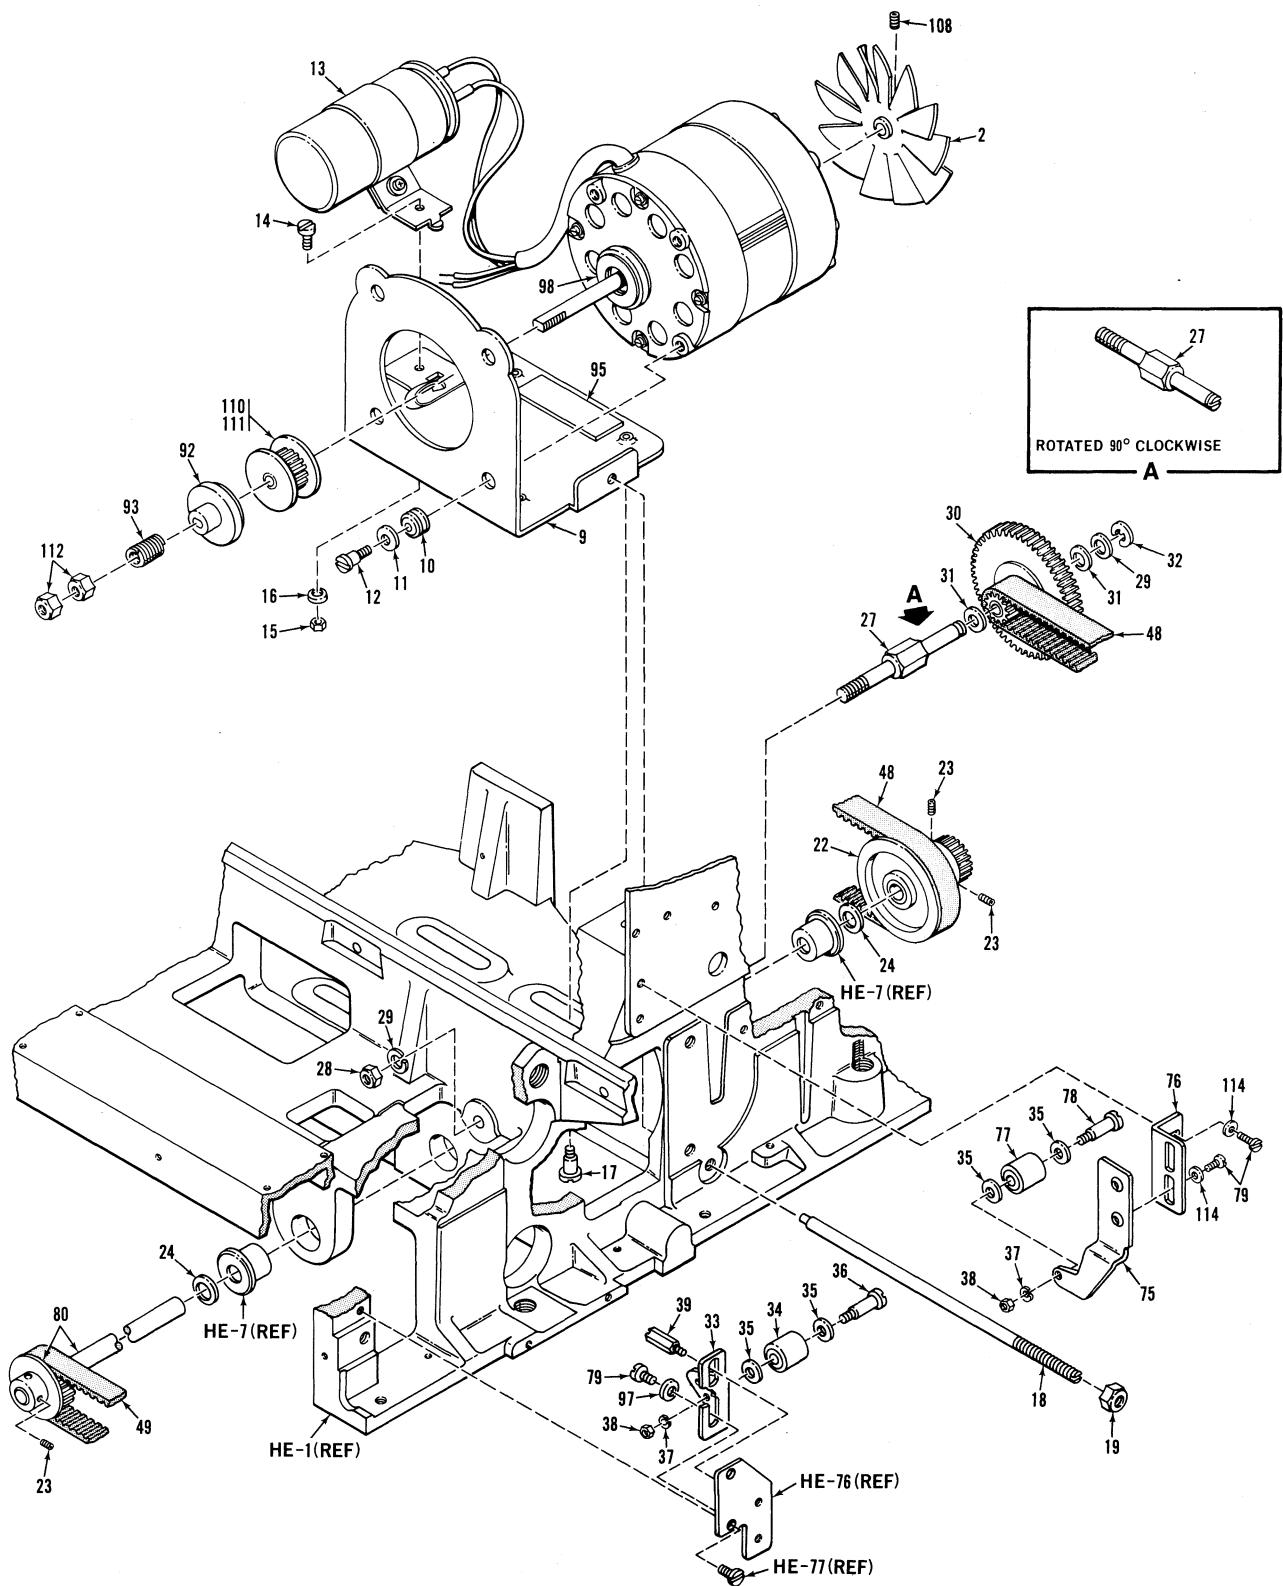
DRIVE MECHANISM - HB (PART 1)
